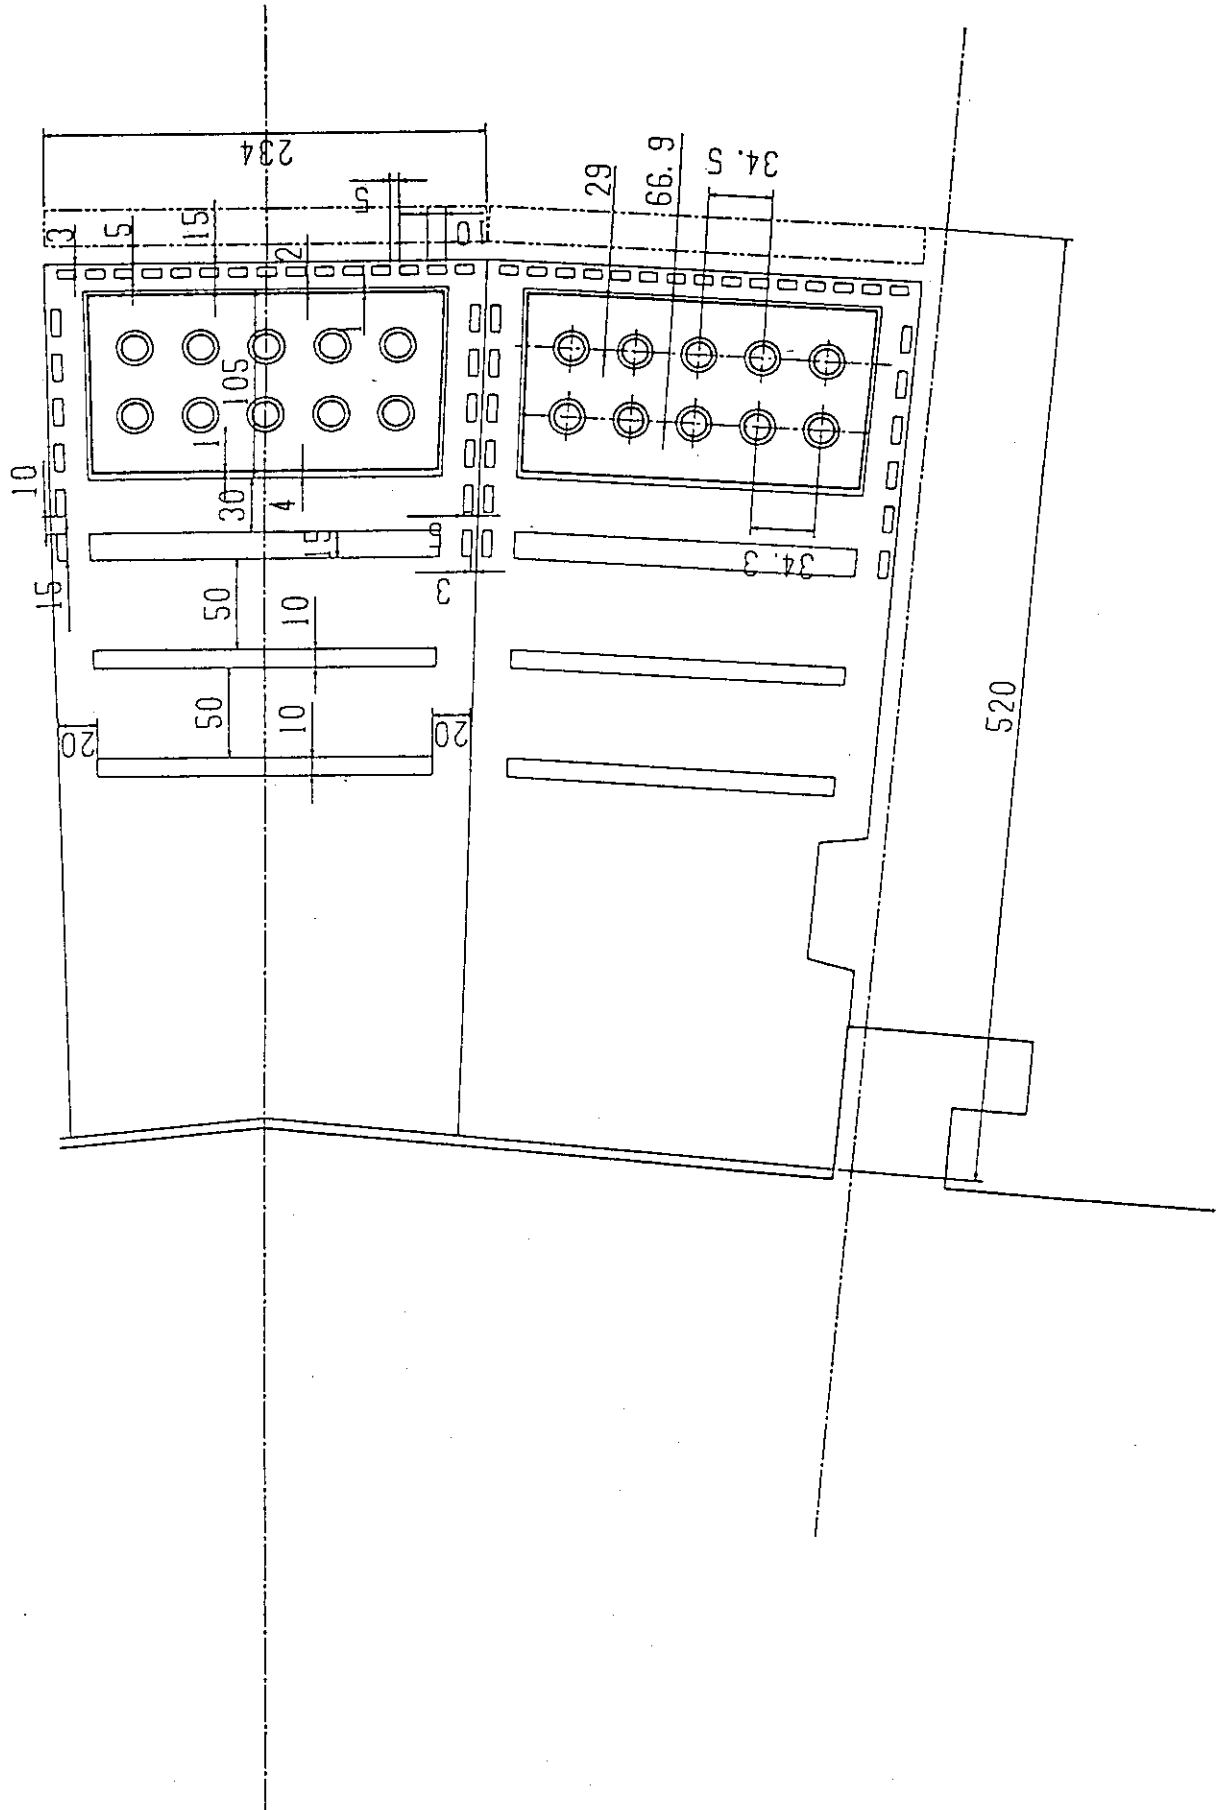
Cross-sectional view of the mixed pebble bed blanket at inboard midplane
